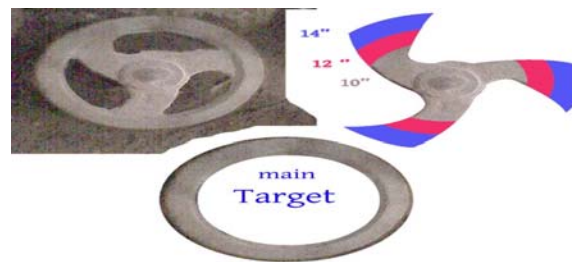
Inner part and outer part (main target) of the Pattern
